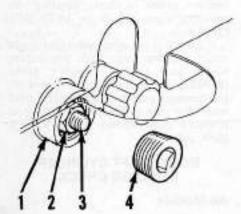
View showing location of locknut used to adjust connecting link on low profile madels.
